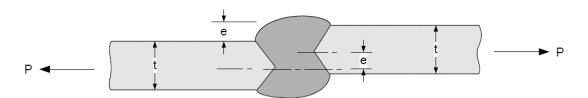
Centerline Offset Misalignment of Butt Welds in Flat Plates
